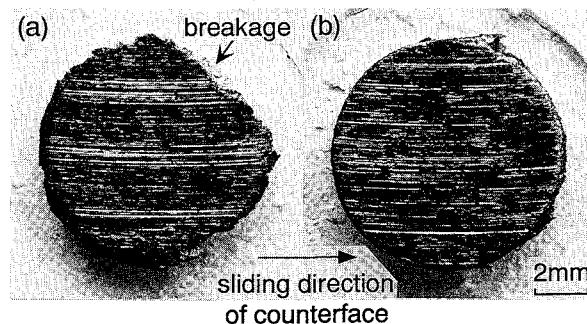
Worn surfaces of the Al-2.5 mass%Cr alloy specimens produced by (a) the conventional centrifugal casting and (b) the CDC process.
